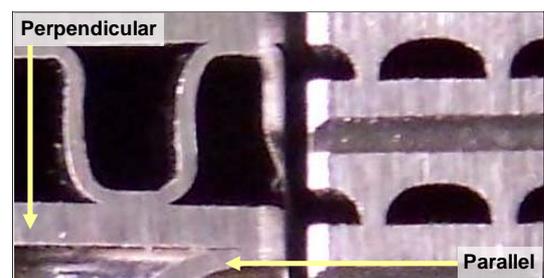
Defining parallel and perpendicular directions with respect to bond line for FPHE (left), PCHE (right) (indicative only, tests carried out on solid sections)
